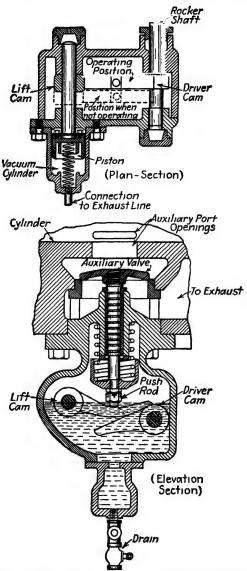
Auxiliary exhaust valve of the Skinner unaflow engine.
